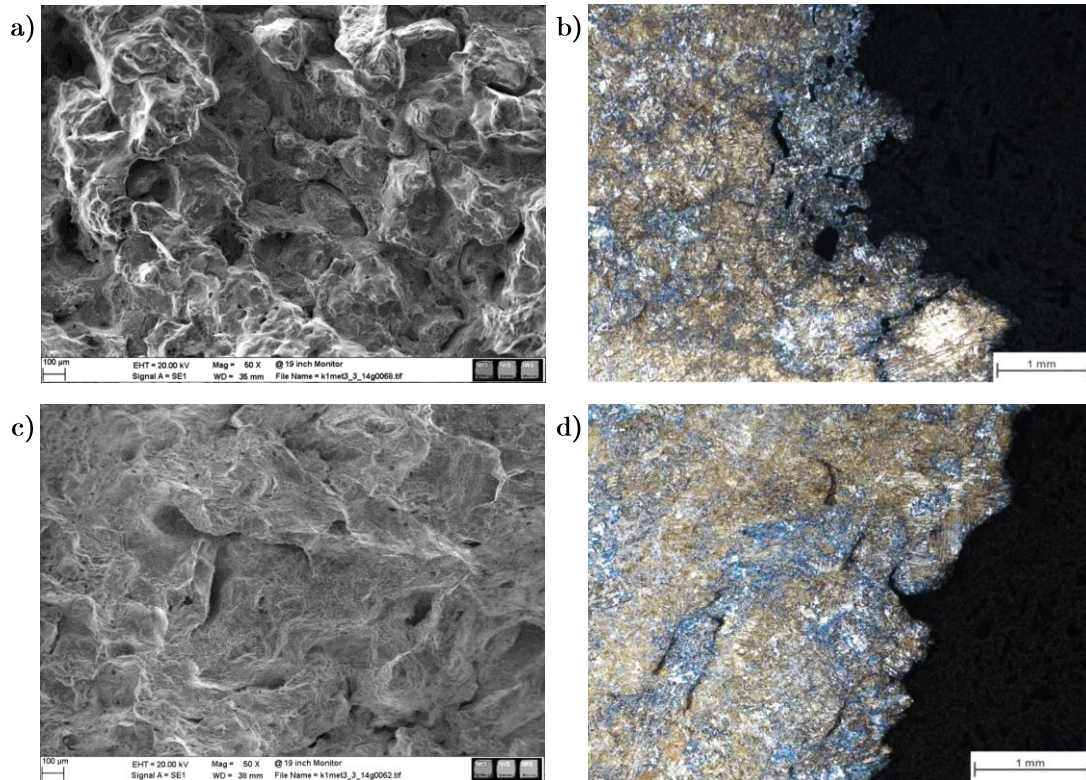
a) Fracture surface of specimen tested at 900°C (RA=26%). b) LOM-image of specimen tested at 1000°C (RA=32%). c) Fracture surface and d) LOM-image of specimen tested at 950°C (RA=24%).
